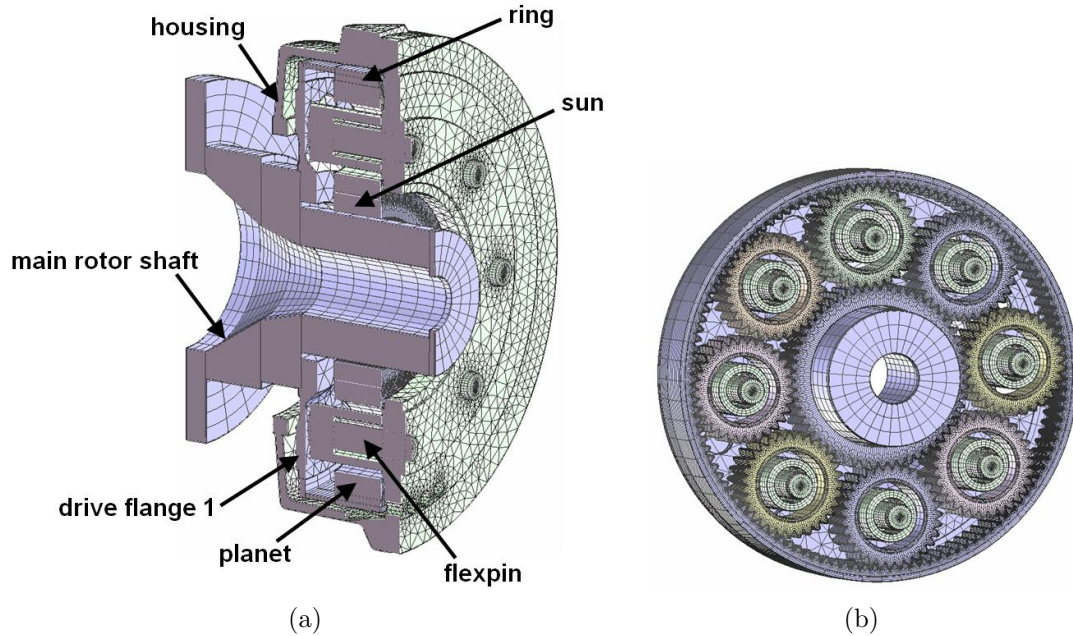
(a) Cutaway view of the finite element model of stage 1 on the W3600 gear train, and (b) View of the finite element model of stage 1 on the W3600 gear train from the rear of the gearbox with the carrier and housing not pictured.
